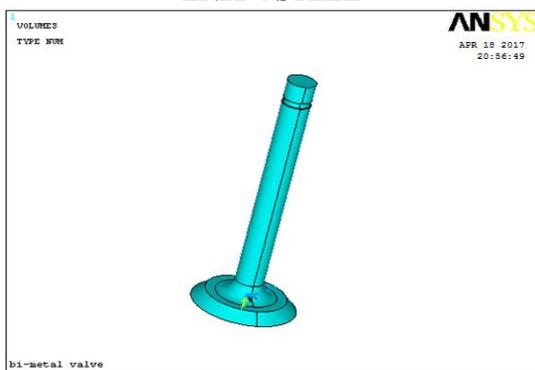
BI-METAL VALVE OF VALVE SEAT – EN21-4 STEEL
